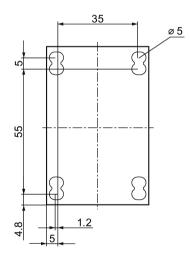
Drilling plan for contactors with spring-loaded connections (size S00)
